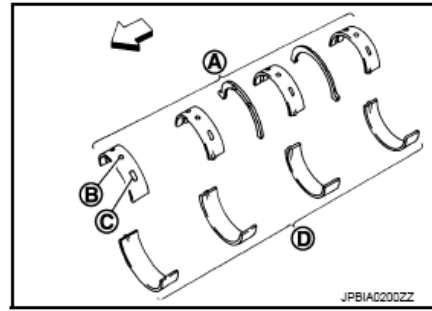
Identifying Cylinder Block Side And Lower Cylinder Block Side Bearing Halves
